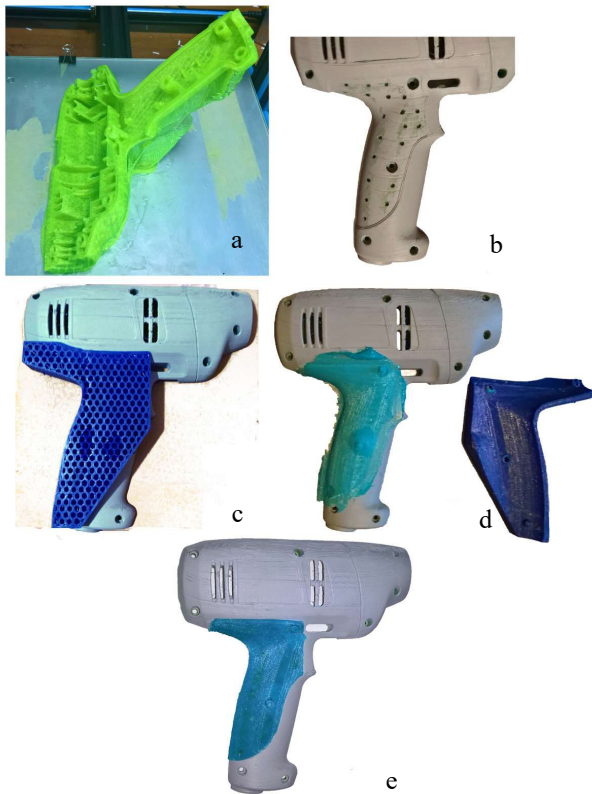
,*e* shows the prototype of a tool casing for a corded drill with an overmolded soft surface which serves as padding on the handle. The drill casing was printed in an inclined position (Fig. 9,*a*) in order to reduce the amount of required support material. Similar to the previously shown mouse and toothbrush models, no geometry was generated prior to 3D-printing to serve as mechanical bonding joints with overmolded elastomer. The 2.4 mm thickness of the part in the handle region was sufficient to drill holes for accessing the internal cellular geometry created by part infill (Fig. 9,*b*). For increased surface quality, the rigid part has been sanded and primed. A one-piece mold was designed and fabricated using the same process and material. The mold was attached to the drill case prototype using screws through mounting holes designed to match the functional screw holes on the casing (Fig. 9,*c*). After curing and demolding, any resulted burrs (Fig. 9,*d*) can be removed using a sharp tool.
